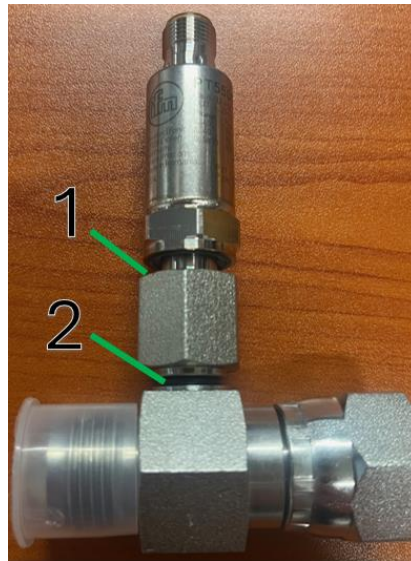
Assemble T piece with 1 factory IFM sensor seal and 2 Oring with back up ring supplied
